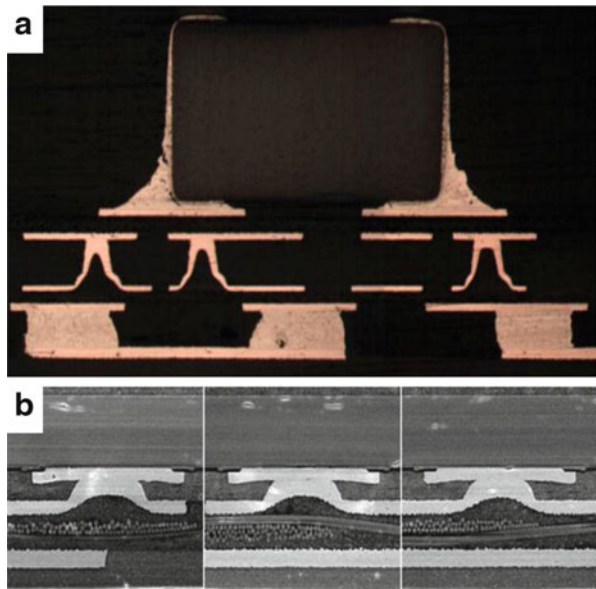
shows solder joint failures on two early drop failed components, as well as crack initiations on adjacent solder joints. Other than the undesired solder joint shape on the first failed module (failed at 619 drops), the crack initiations location match what we typically see on WLCSP.
